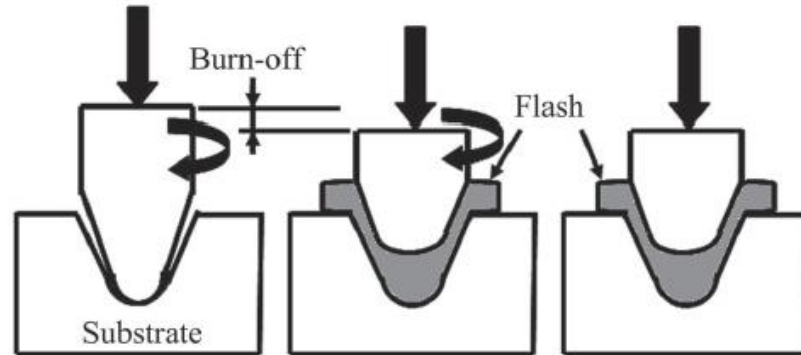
Schematic diagram showing (a) dwell stage, (b) burn off stage and (c) forging stage of the Friction Plug Welding process (reprinted) [12]
